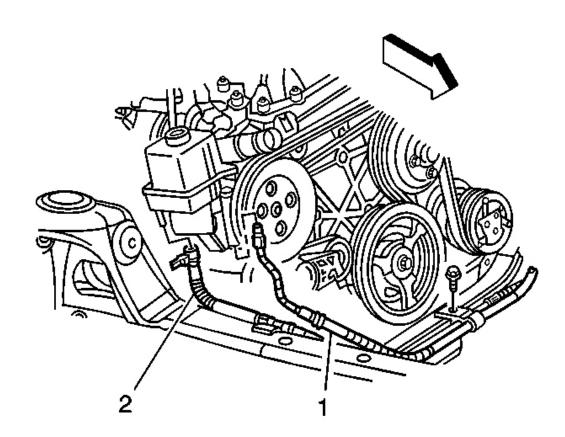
Removing/Installing Power Steering Hoses Courtesy of GENERAL MOTORS CORP.
